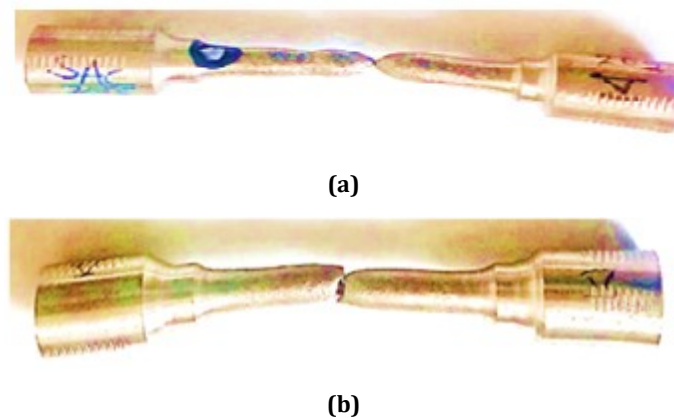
TYPICAL DUCTILE FAILURE OF (A) SAC305 AND (B) SAC405 SOLDER
